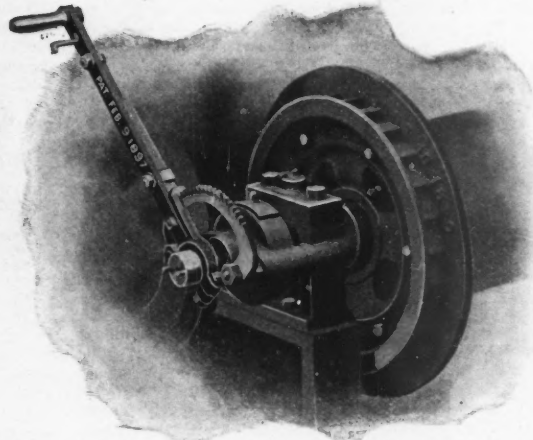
Lidgerwood Friction Lever Latch for Hoisting Drum of Derrick Engine.
